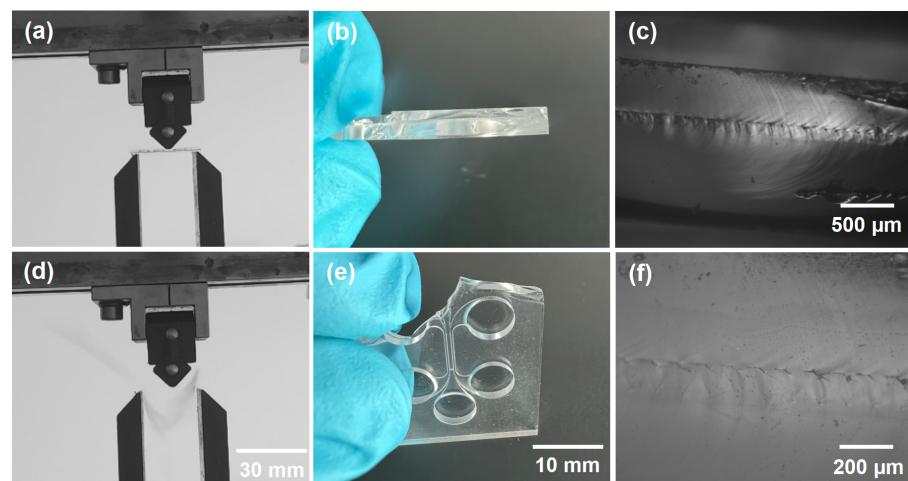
(a,d) Mechanical resistance test on the chip. (b,e) Photos of the broken chip after the mechanical resistance test. (c,f) Optical pictures of the broken structure's welding seam from the side of the sample.
